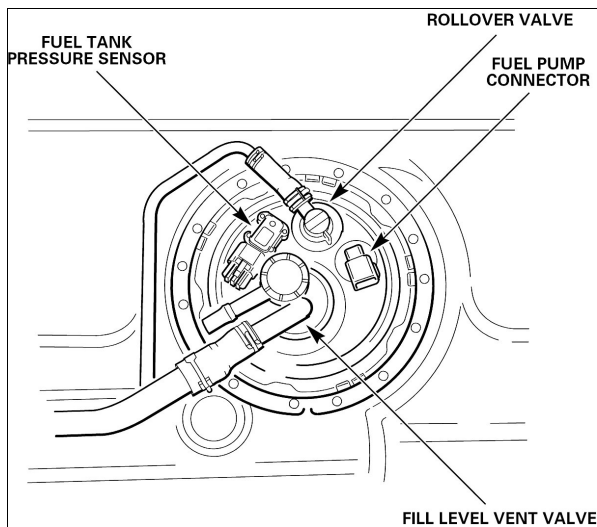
FUEL TANK EVAPORATIVE FLANGE
